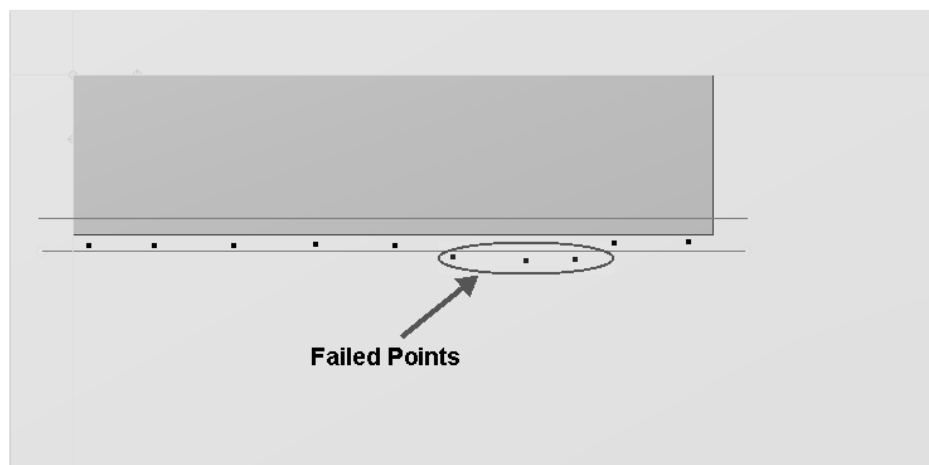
Top view of perfect plane, tolerance boundary zone, and inspection points.
